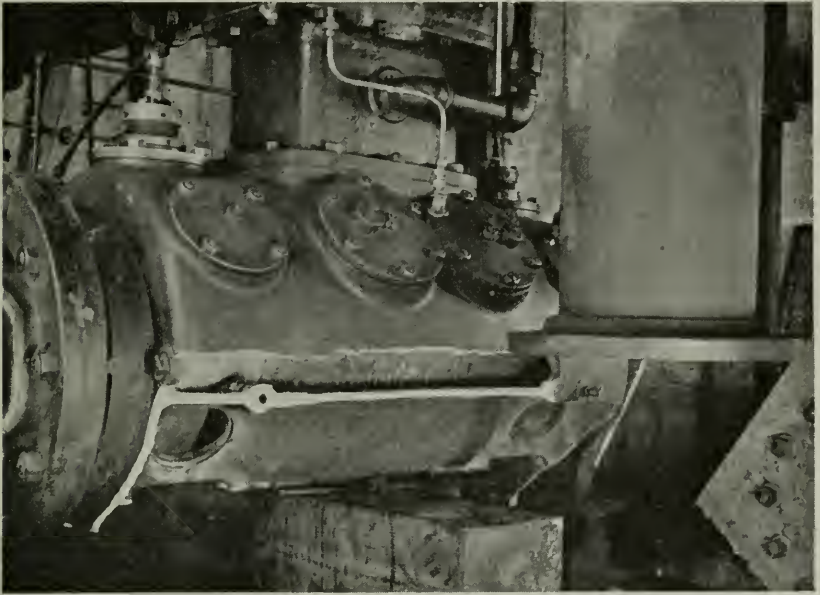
High pressure cylinder on a two-stage motor-driven air compressor damaged by an explosion. Excessive air pressure or a combustion explosion may have been the cause. The operating engineer was killed.
